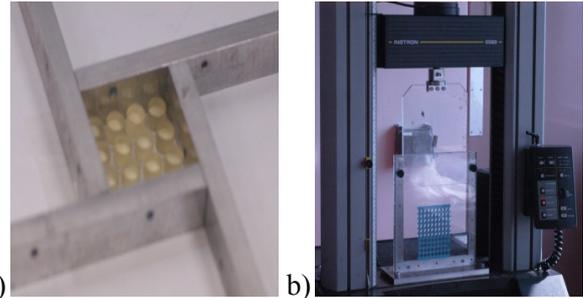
a) The mould. b) A specimen stands in the housing on the “Instron 5569” machine.
